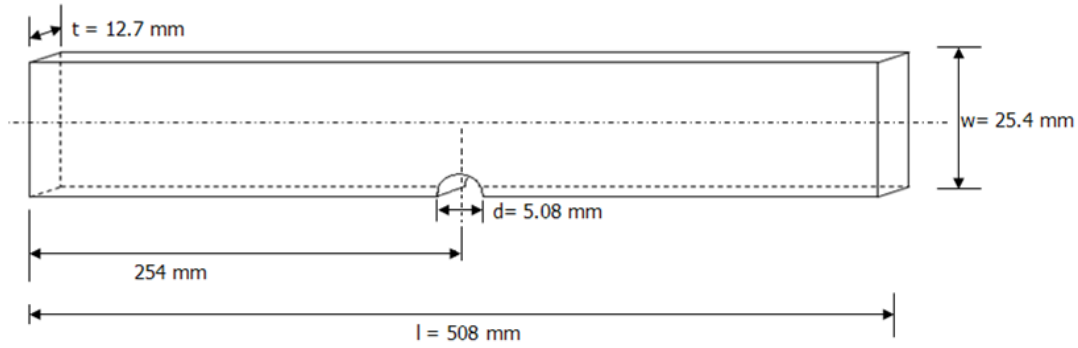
Al 7075-T651 Single-Hole Sample Dimensions
